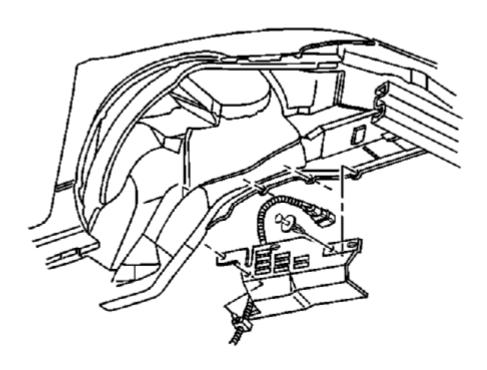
Right Engine Splash Shield & Retainers Courtesy of GENERAL MOTORS CORP.
